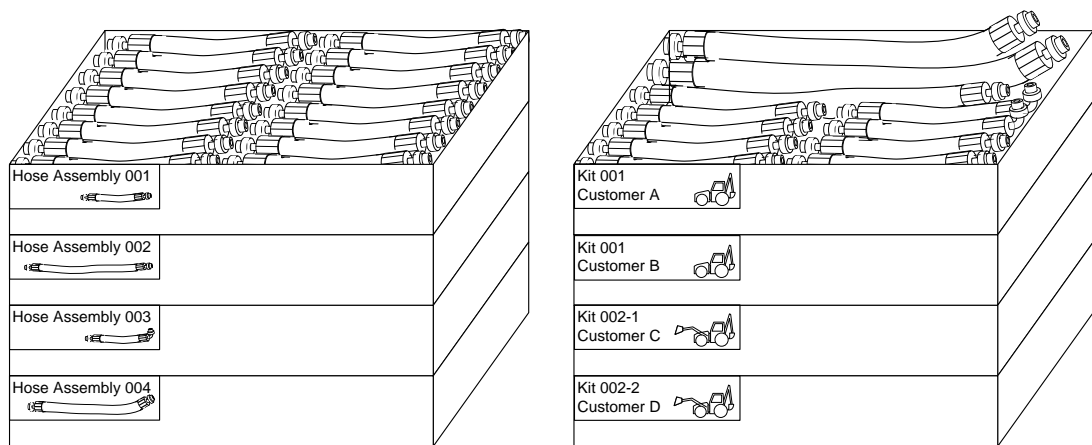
Batches of hose assemblies (left) versus hose assembly kits (right).
